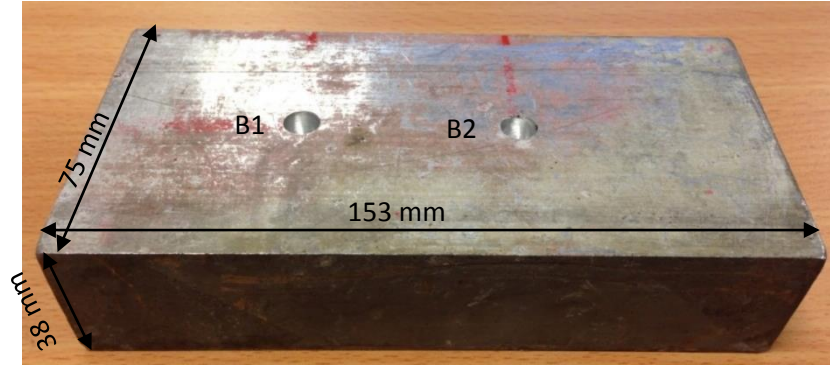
Test piece 3 (B1 and B2 are the bottom holes)
